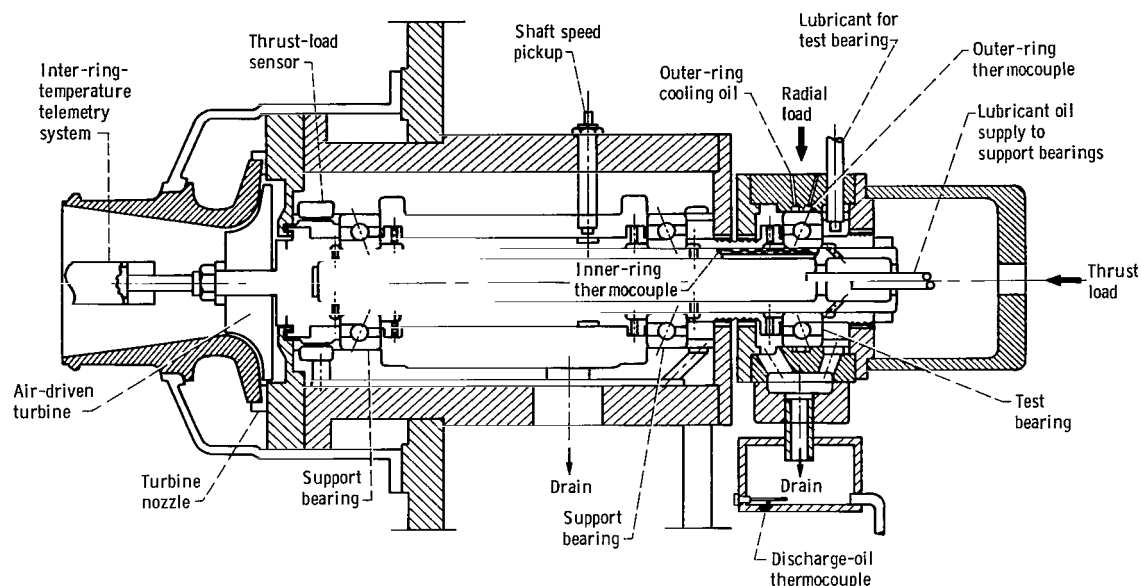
Schematic of high-speed, small-bore-bearing test machine.
